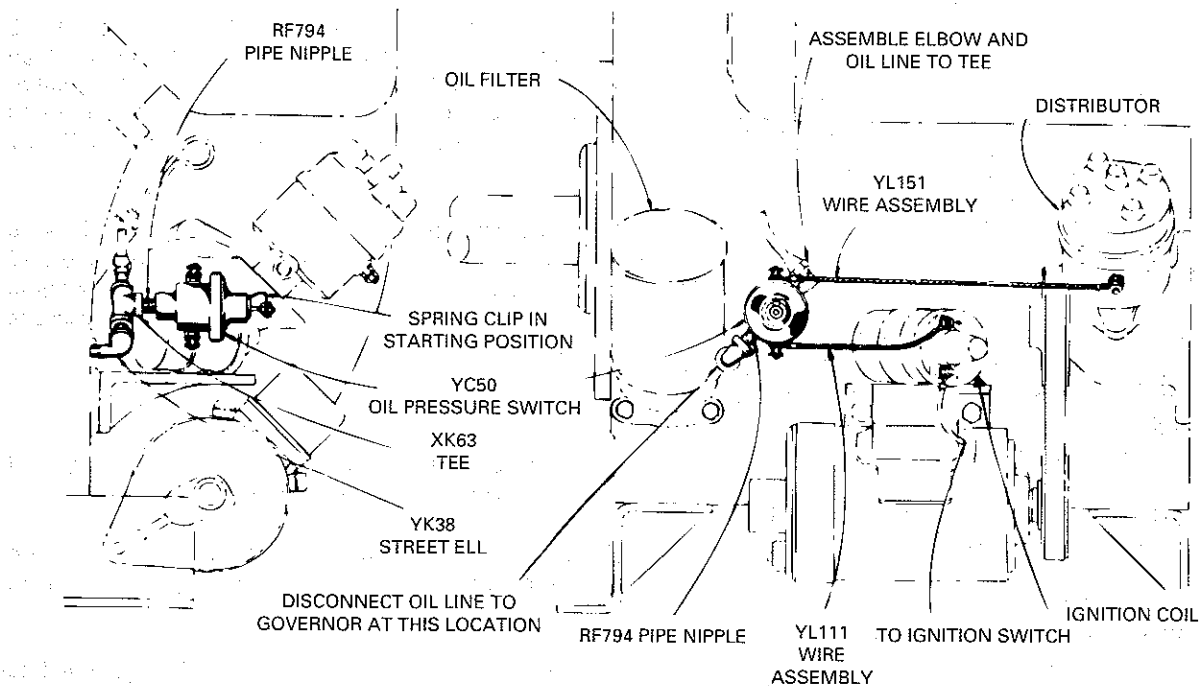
Oil pressure switch mounting, with battery ignition, distributor
